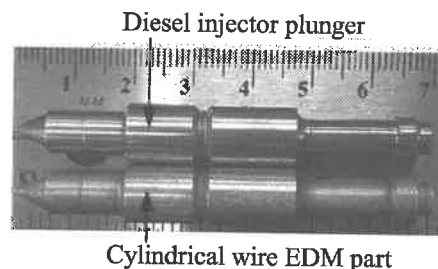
A cylindrical wire EDM part with the same shape as the diesel engine injector plunger
